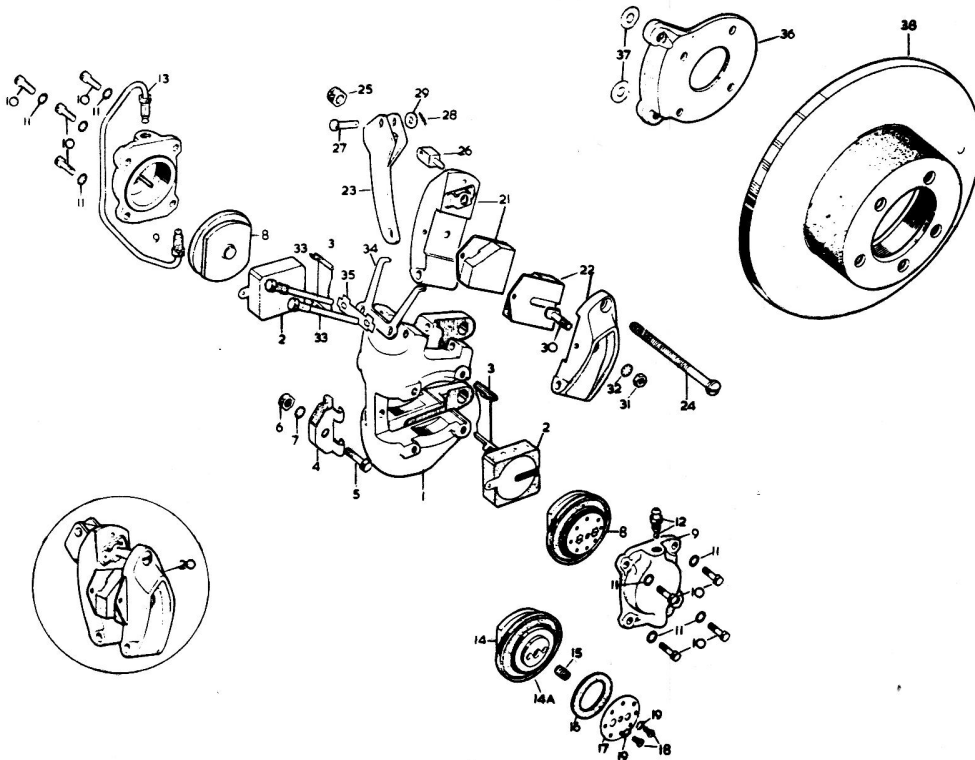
EXPLODED VIEW OF TYPICAL REAR DISC BRAKE CALIPER ASSEMBLY
